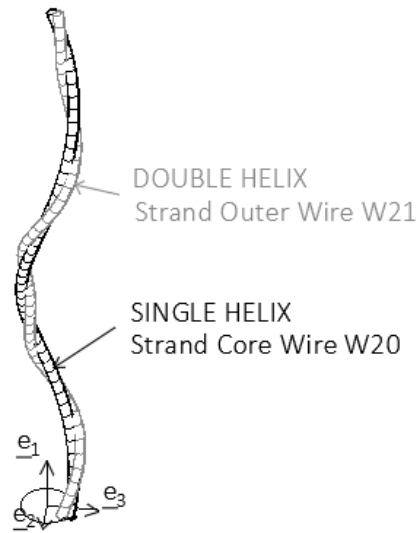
Single and Double Helix Wires Three-Dimensional View
